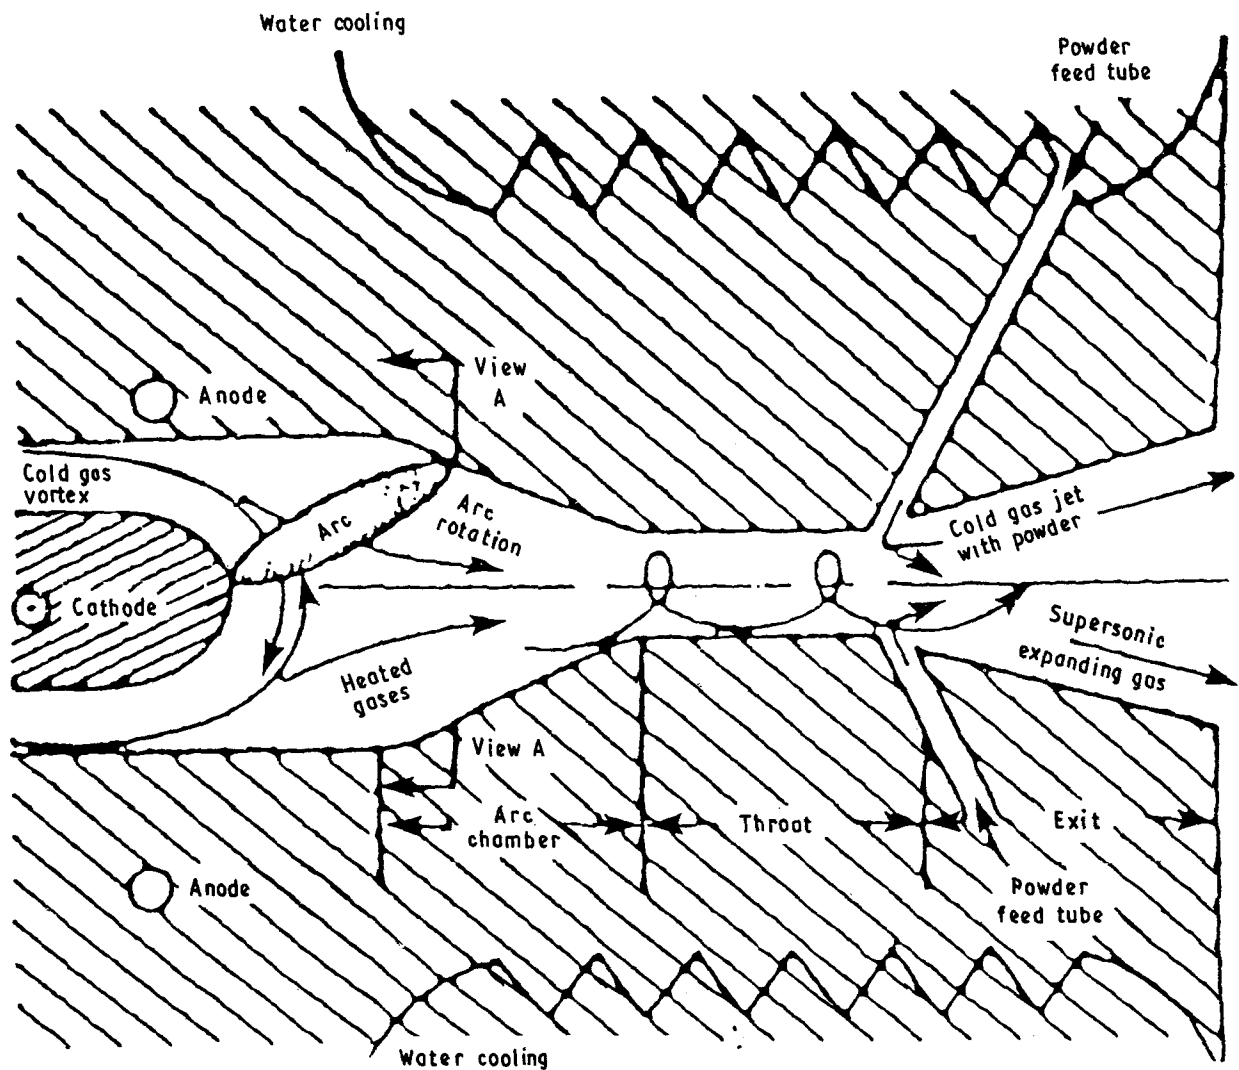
Cross-sectional schematic drawing of the plasma-gun showing the supersonic expanding gas jet [38].
